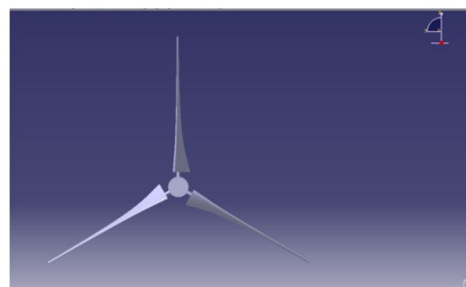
Model assembly of rotor blade assembly done in CATIA.
